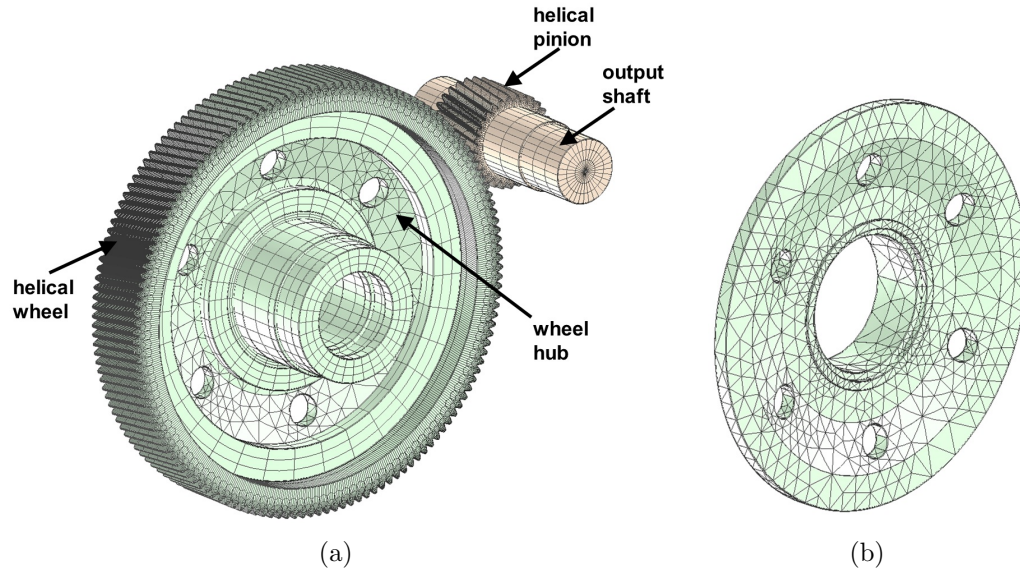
(a) W3600 stage 3 helical wheel and pinion, and (b) externally meshed wheel hub.
